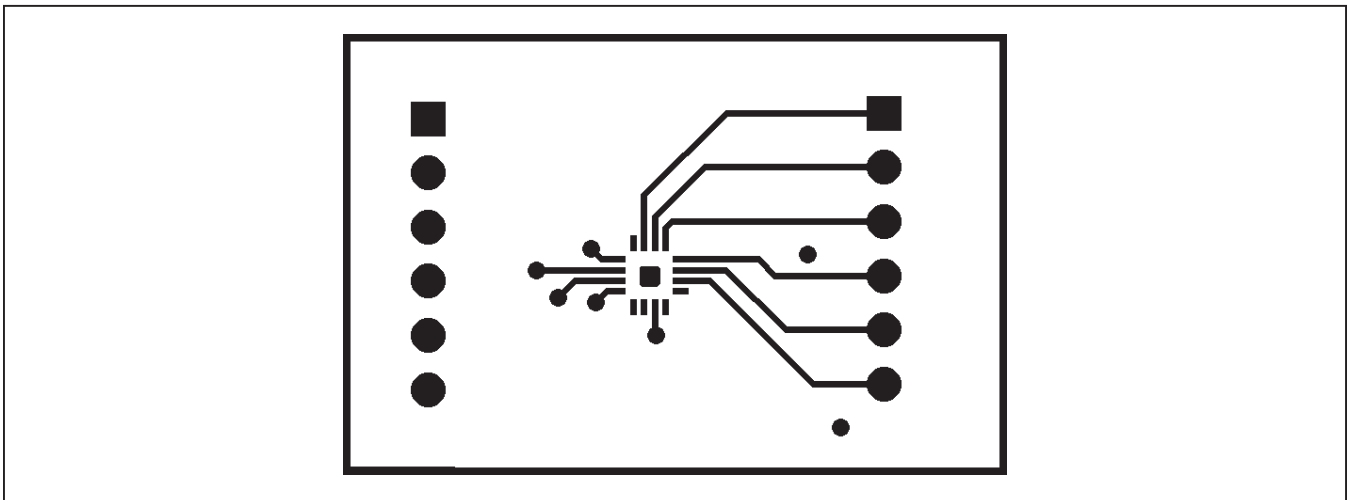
MAX5487PMB1 Peripheral Module PCB Layout—Component Side
